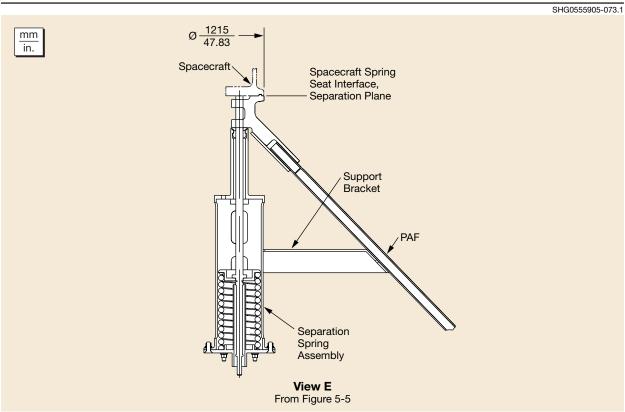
1194-4 PAF Separation Spring Assembly
